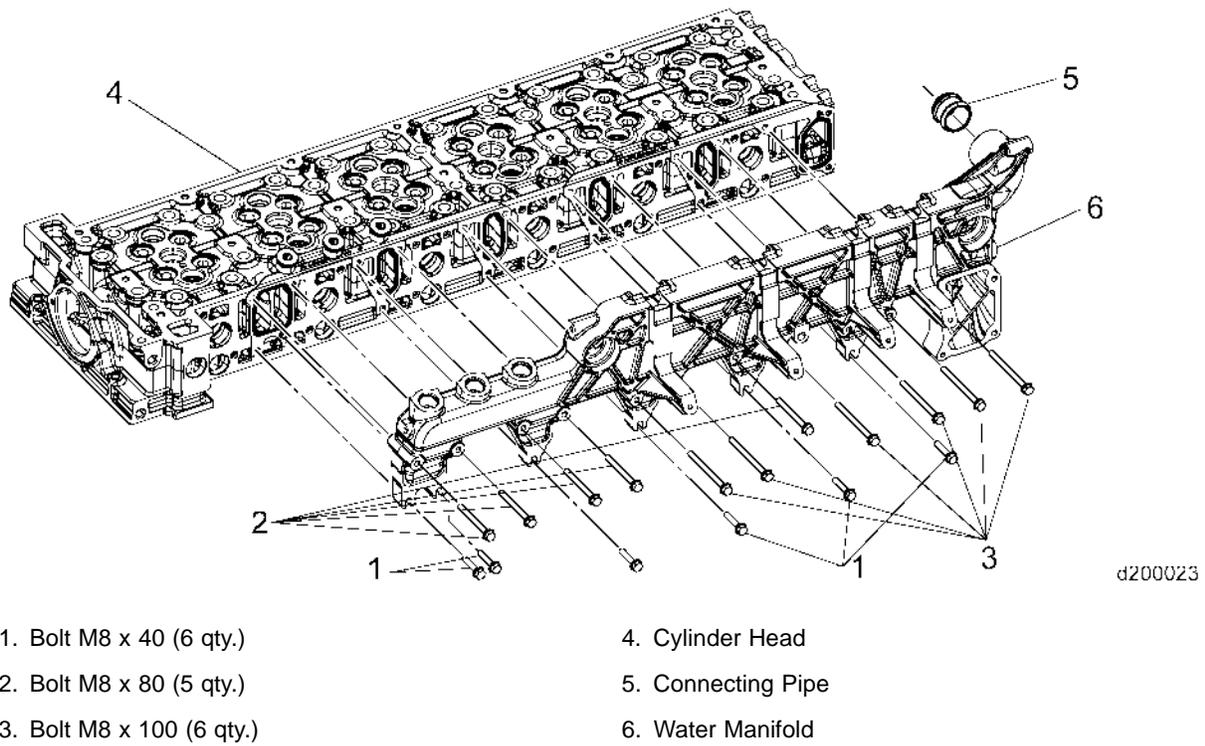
DD15 & DD16 Water Manifold and Related Parts
